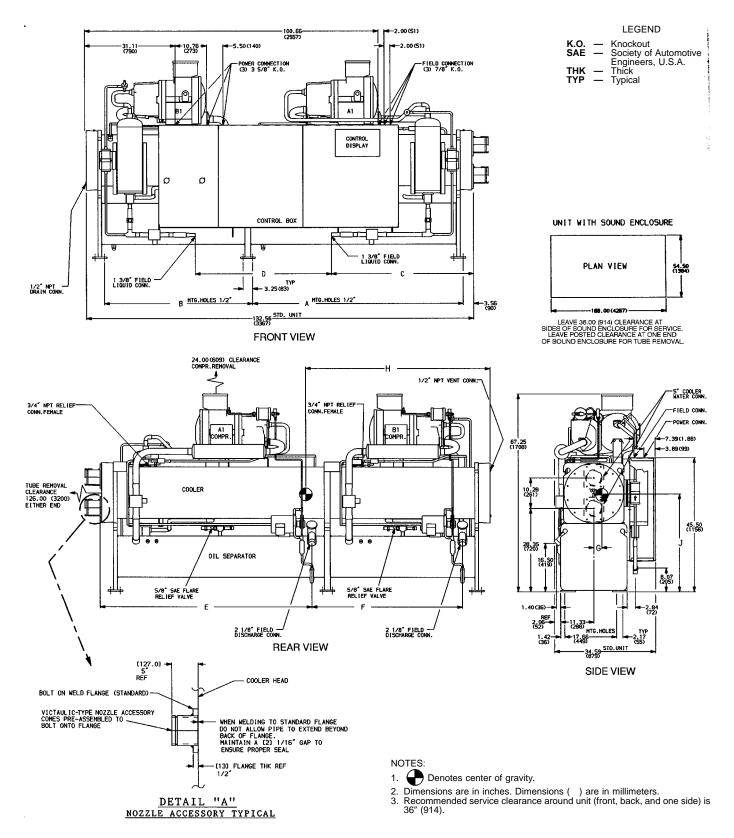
Base Unit Dimensions, 30HXC161-186 Units
